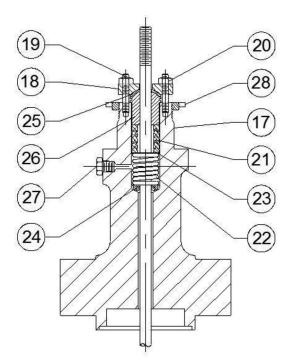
H-900, H-1500 and H-2500 Bonnet Parts
